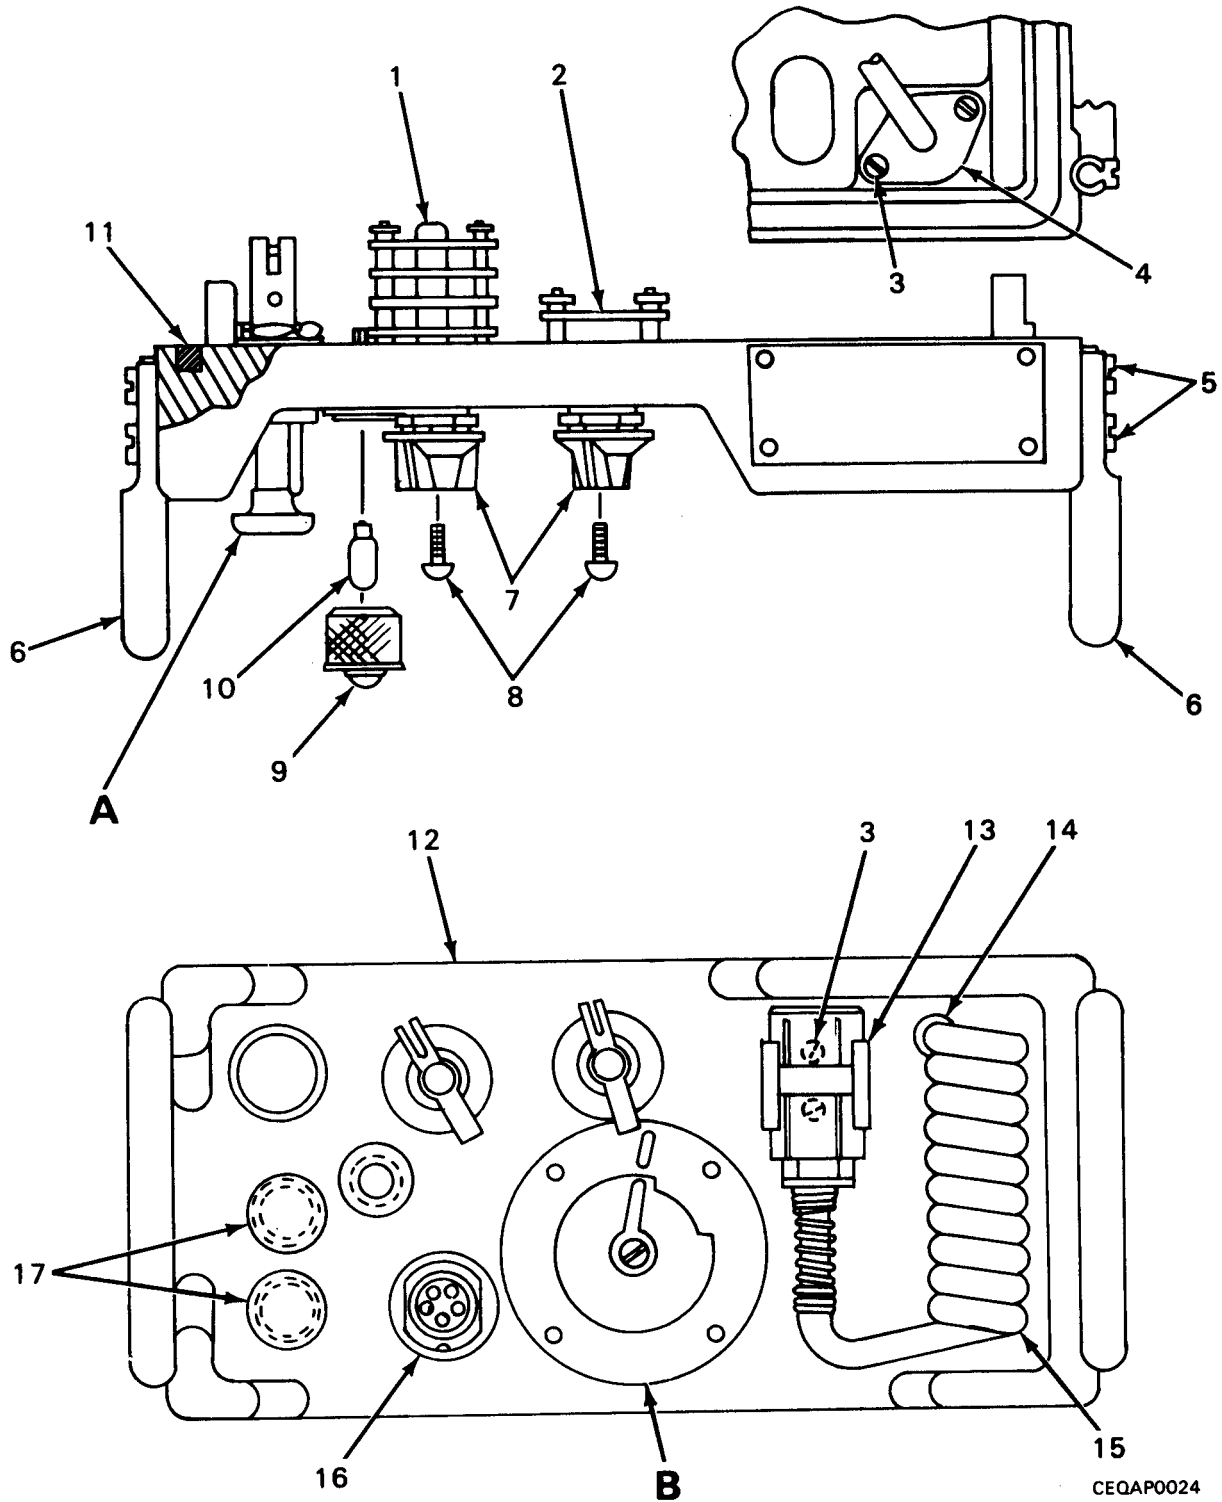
Panel Assembly (AN/GRA-39) (Sheet 2 of 2)
